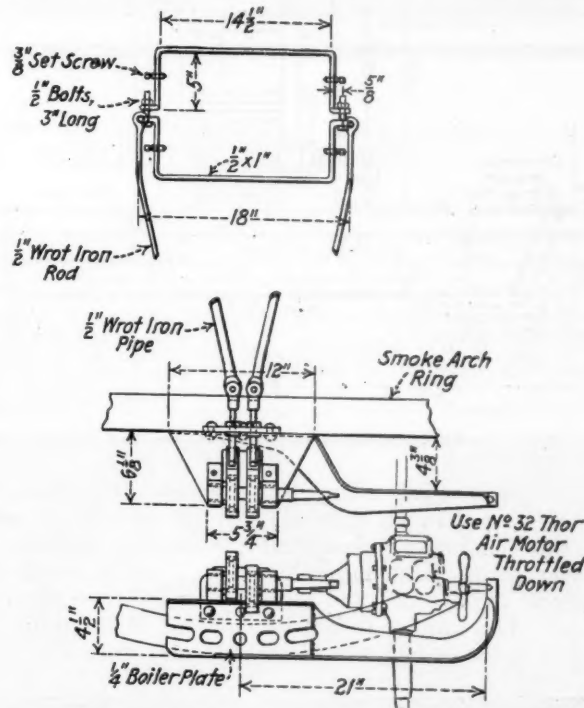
Device for Grinding Locomotive Exhaust Nozzles
